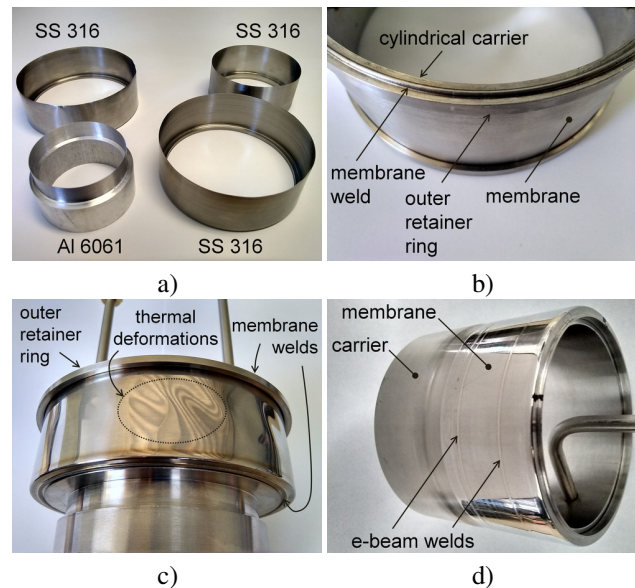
(a) aluminium and stainless steel test membranes; (b) membrane edge welded using two outer retaining rings; (c) membrane edge welded using single retaining ring; (d) membrane e-beam welded directly on its carrier.
